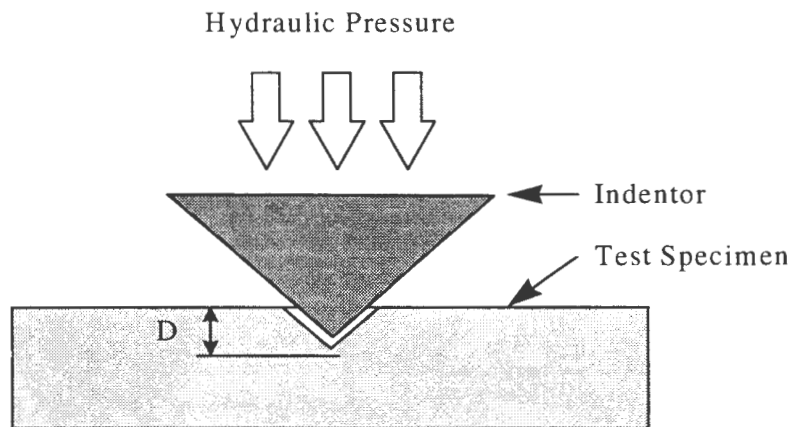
Fabrication of mechanical damage (V-shaped) defects.
